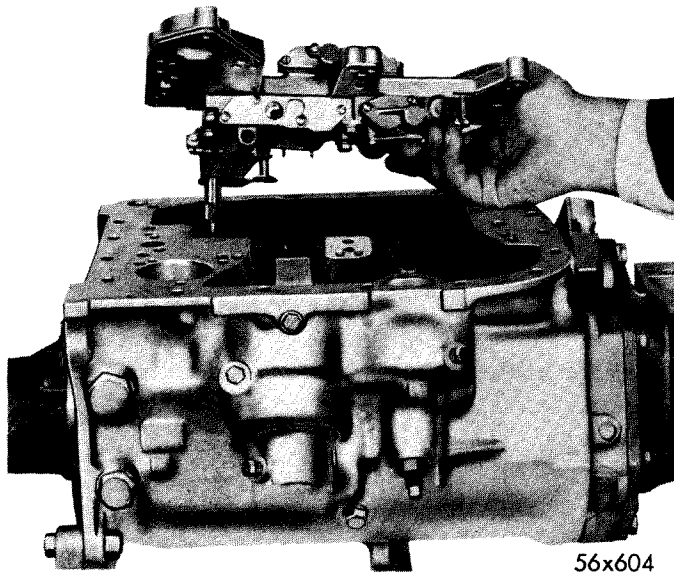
Removal and Installation of Valve Bodies and Transfer Plate Assembly
